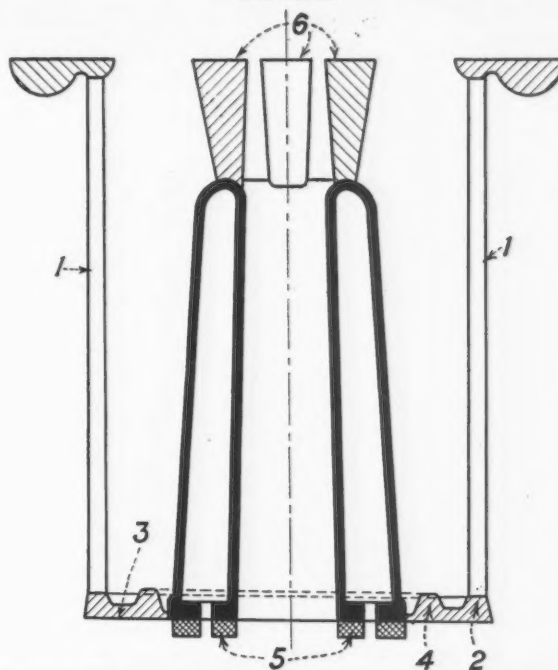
Schematic sketch illustrating method of pouring a tuyere.
